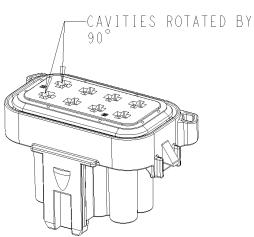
2319023-1 8P Mini Fuse Housing Assembly
